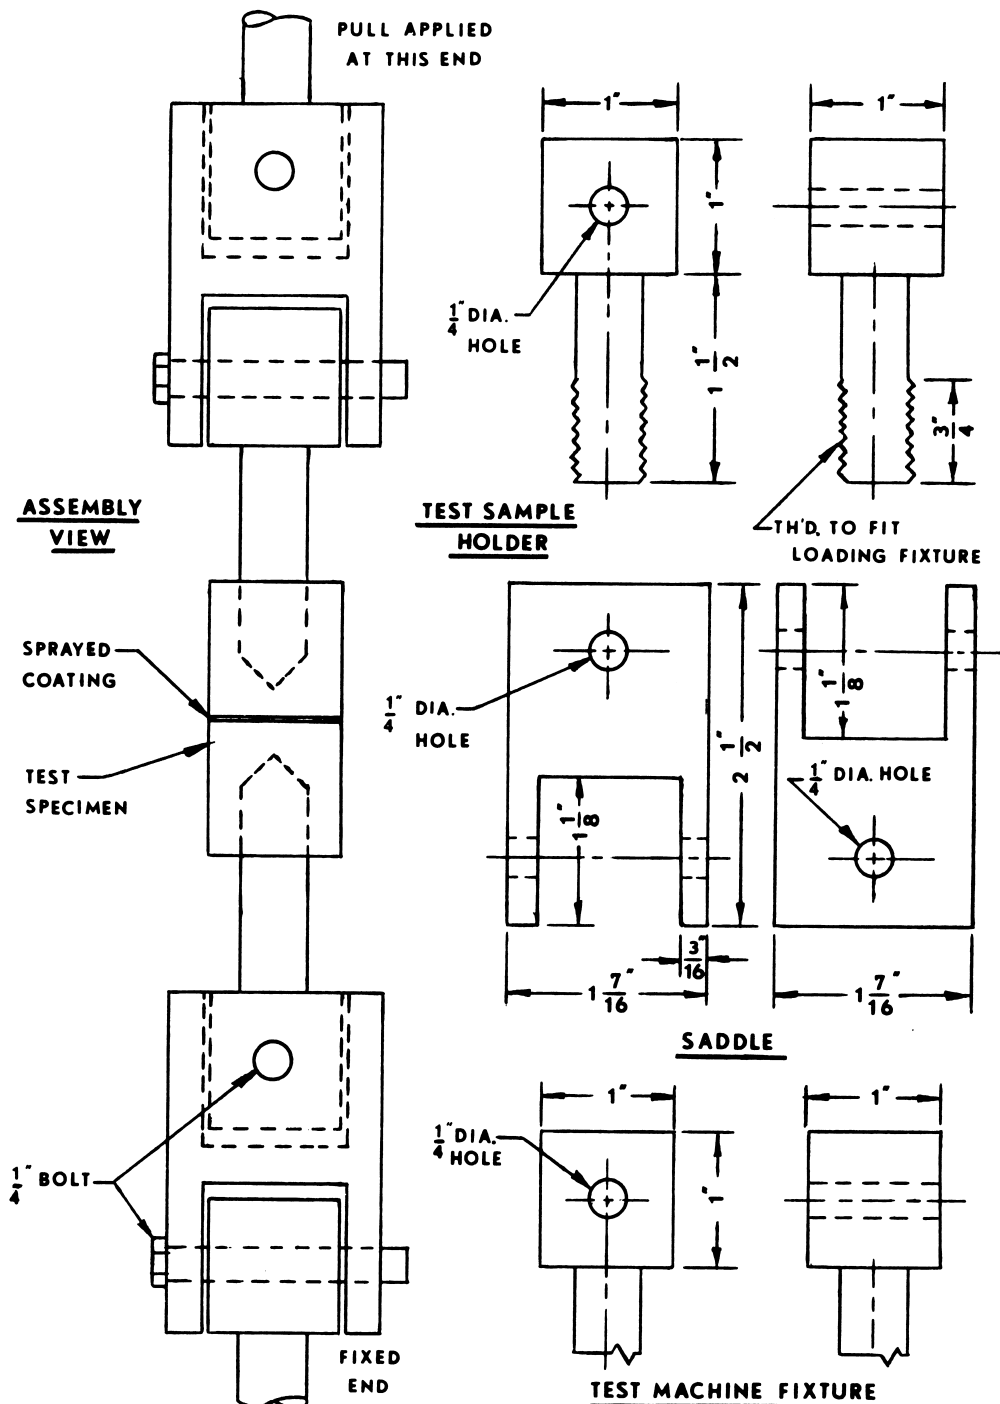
The coating/fixture assembly used for tensile adhesion testing of thermal spray coatings. Dimensions are in inches (1 in. = 25.4 mm). Source: ASTM C 633
